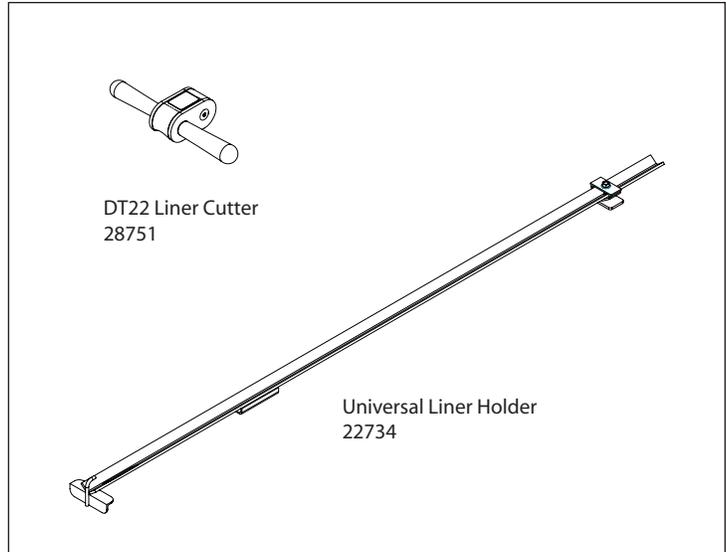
A universal liner holder is used to secure the liner when operating the liner cutter.
